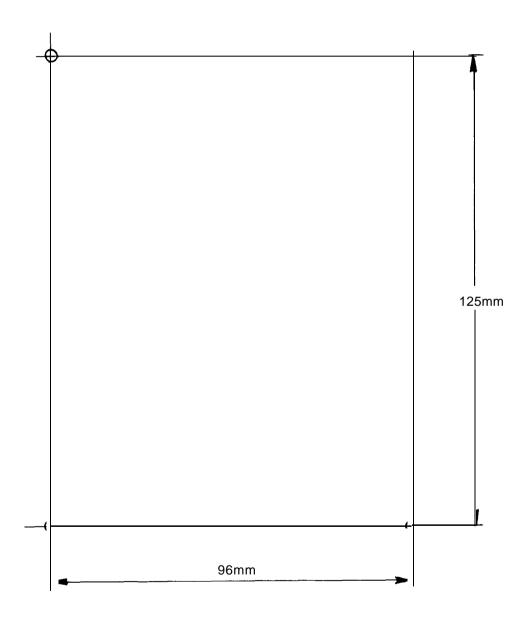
A - WALL MOUNTING FOR THE TRUNK BARRING UNIT
